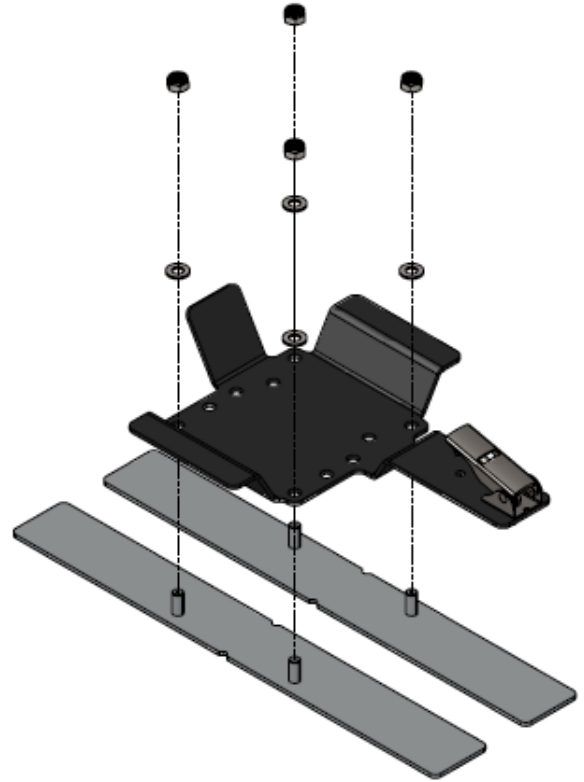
BOTTOM ASSEMBLY OF RS1 MOUNT
